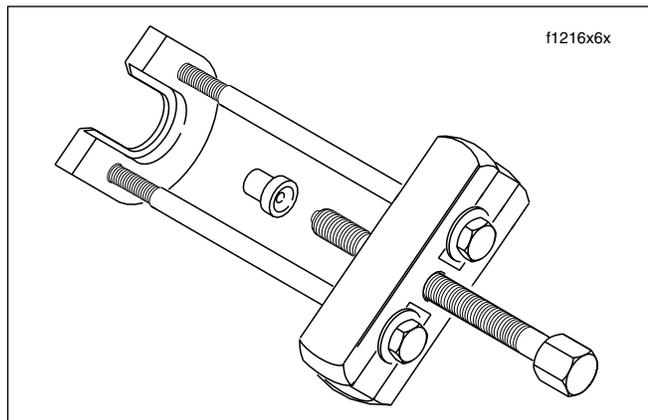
Mainshaft Bearing Inner Race Remover (Part No. HD-34902B)
